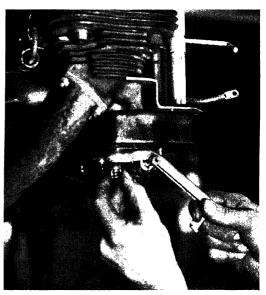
The valve compressing tool being used to DEPRESS VALVE SPRINGS AND REMOVE COLLETS.
